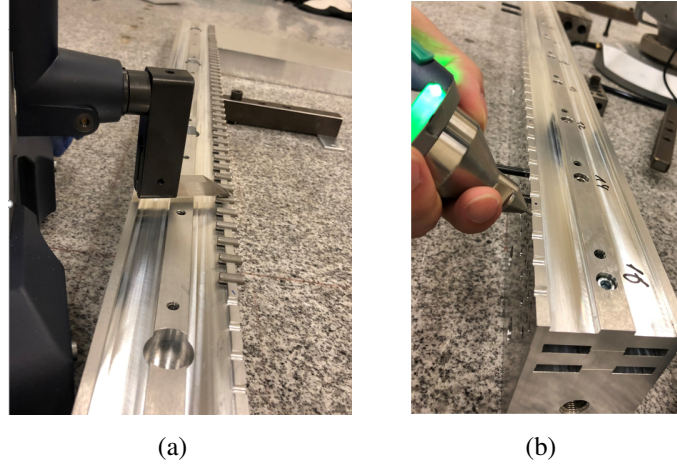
Precision comb geometry measurements: (a) flatness using the height gauge; (b) wire pitch using the FARO-arm to determine the center positions of the comb half-cylinders.
